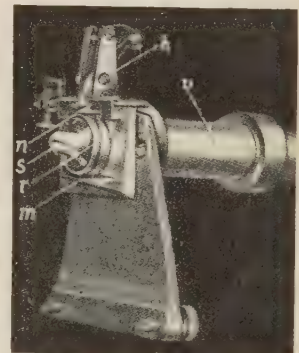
DRILL MOUNTING WITH MIRROR EXTENSOMETER
